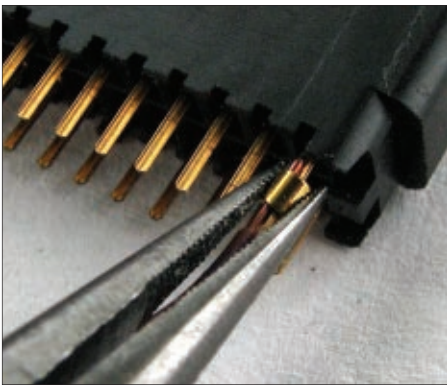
A. The crimp tube technique used to wire to a connector pin.
